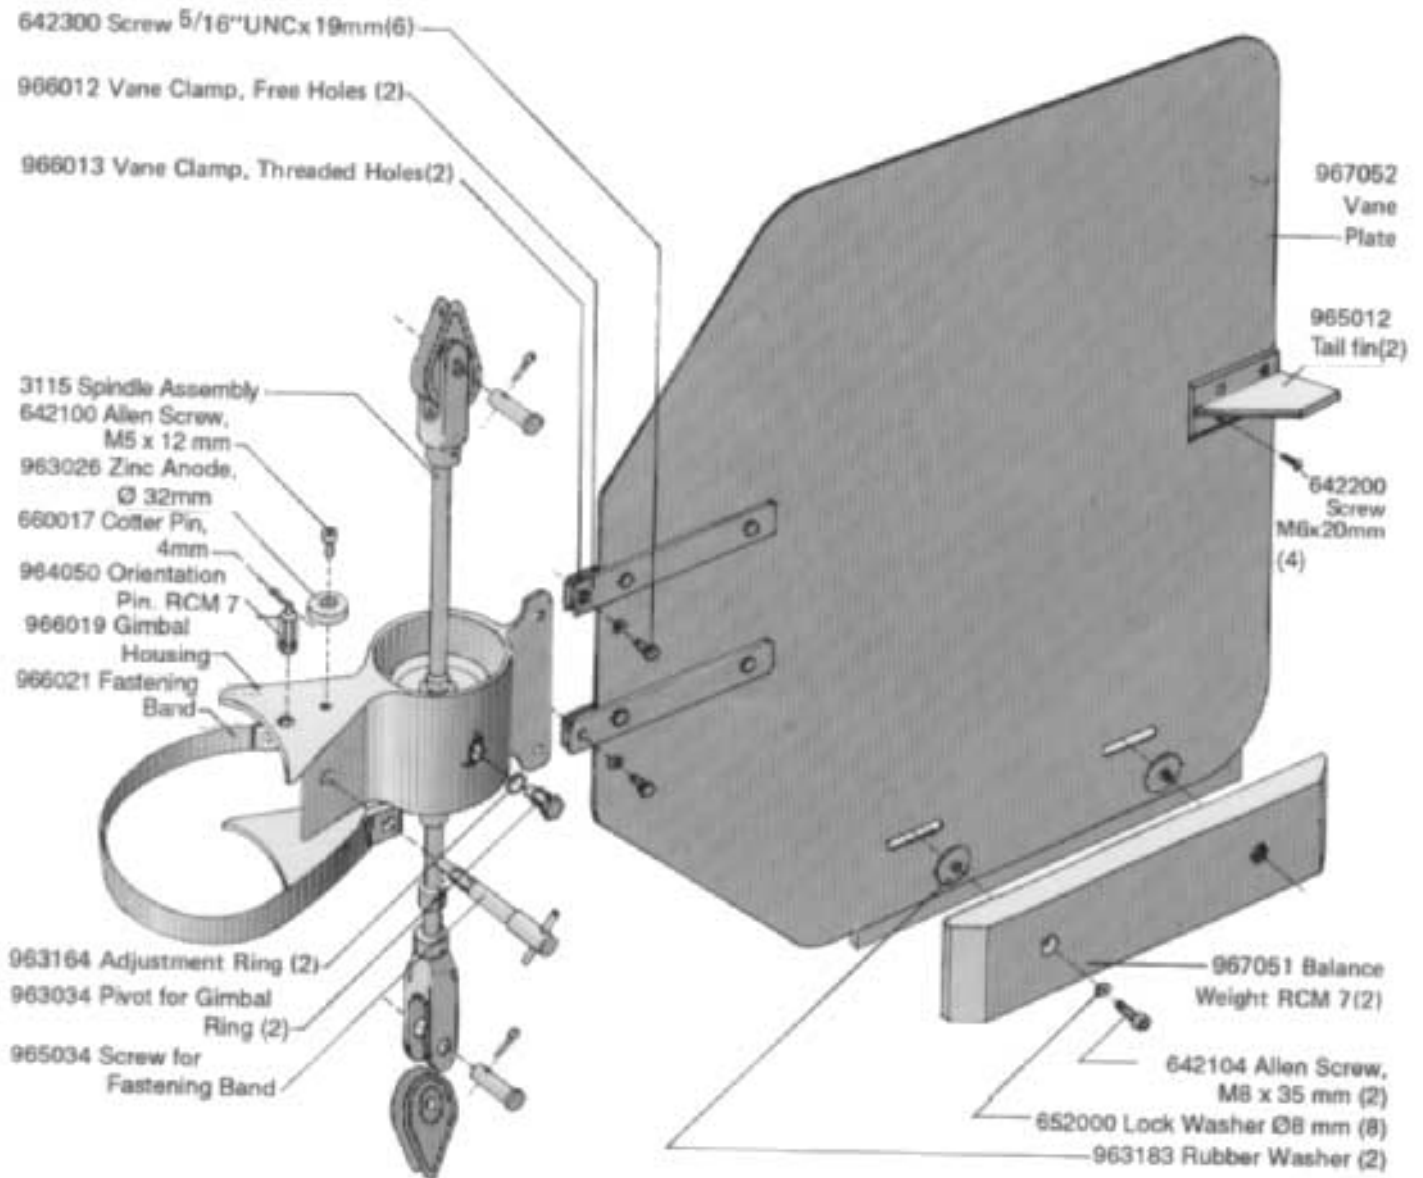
Vane Assembly 3114 (V-3511A)
